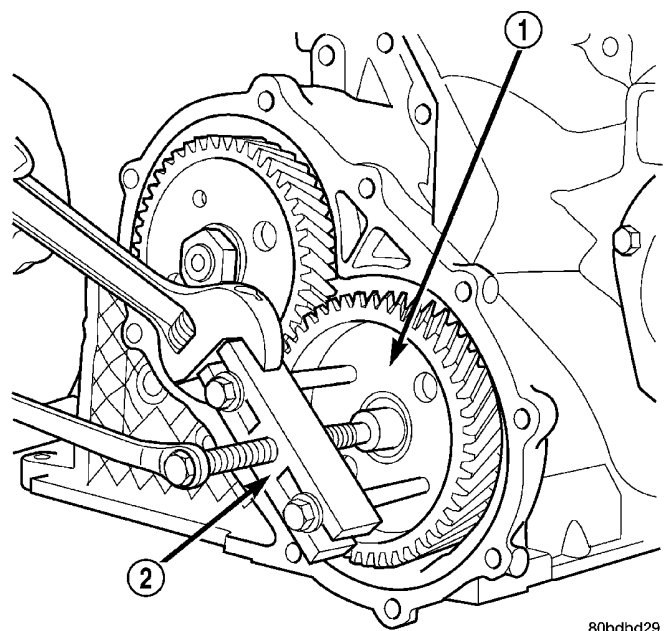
Remove Transfer Shaft Gear Retaining Nut
